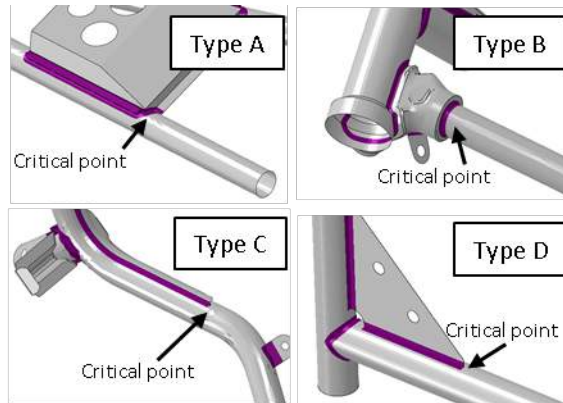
Different motorcycle frame parts with different weld joints.
